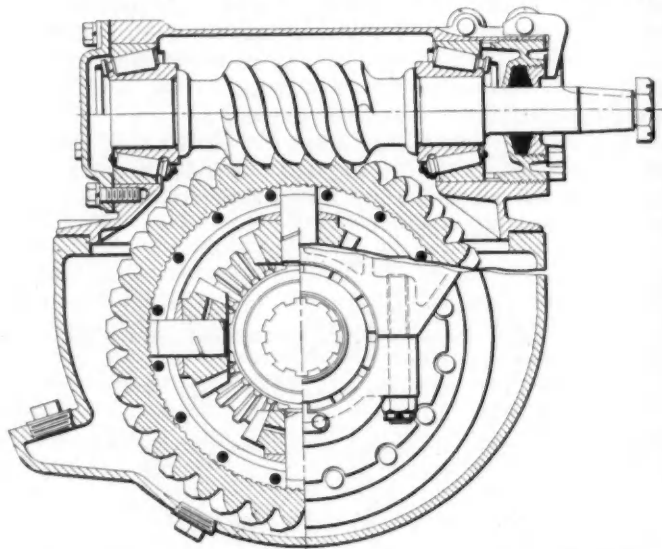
DRAWING SHOWING THE ARRANGEMENT FOR HOLDING THE WORM BEARINGS
